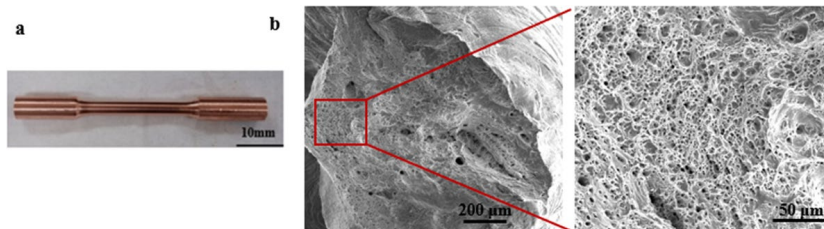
(a) Tensile specimen of Cu-Cr-Zr alloy (b) morphology of tensile fracture
